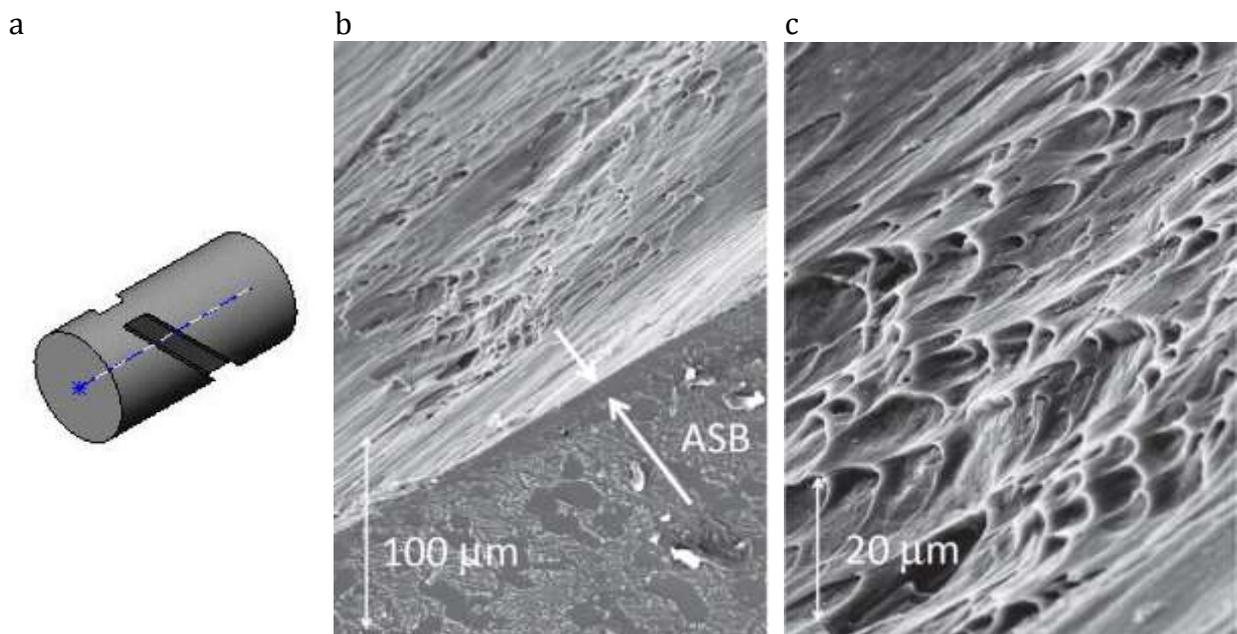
After [23] (a) Shear compression specimen; Microscopic observation of fractured surface (b) 3D view showing ASB; (c) Detailed 3D view showing elongated dimples in the band plane
